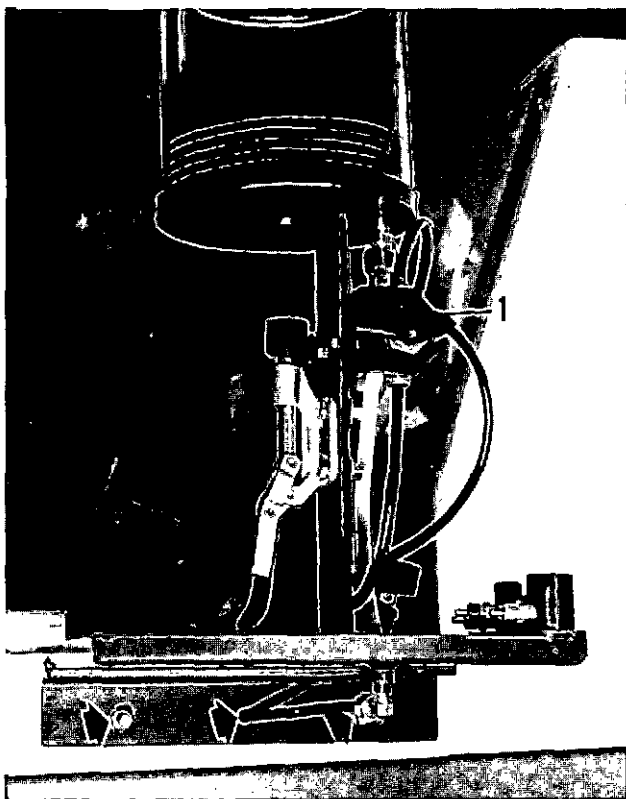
Spray Tester mounted to 3375317 Injector Test Stand
